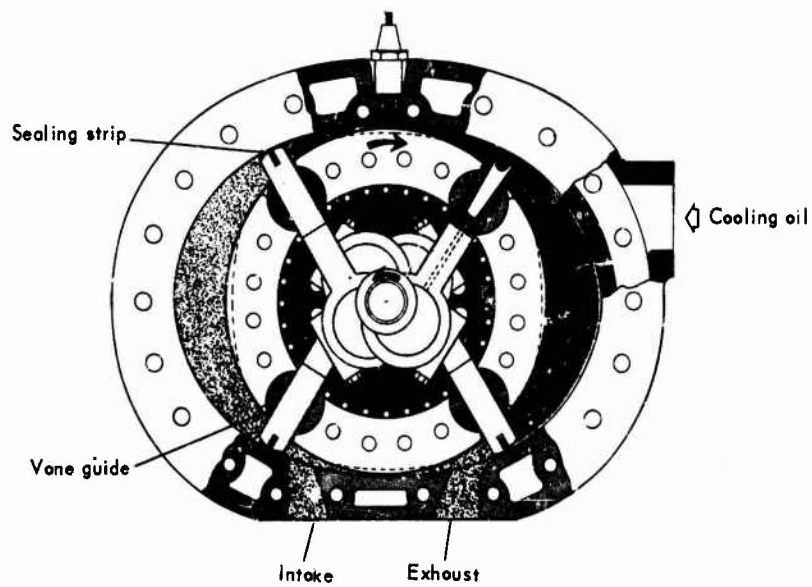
Cross Section of Renault-Rambler Rotary-Piston Engine
